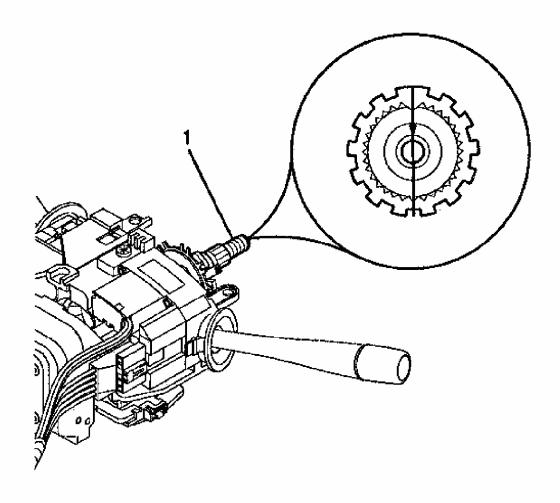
View Of Block Tooth Of Steering Shaft Assembly In 12 O'clock Position Courtesy of GENERAL MOTORS CORP.
